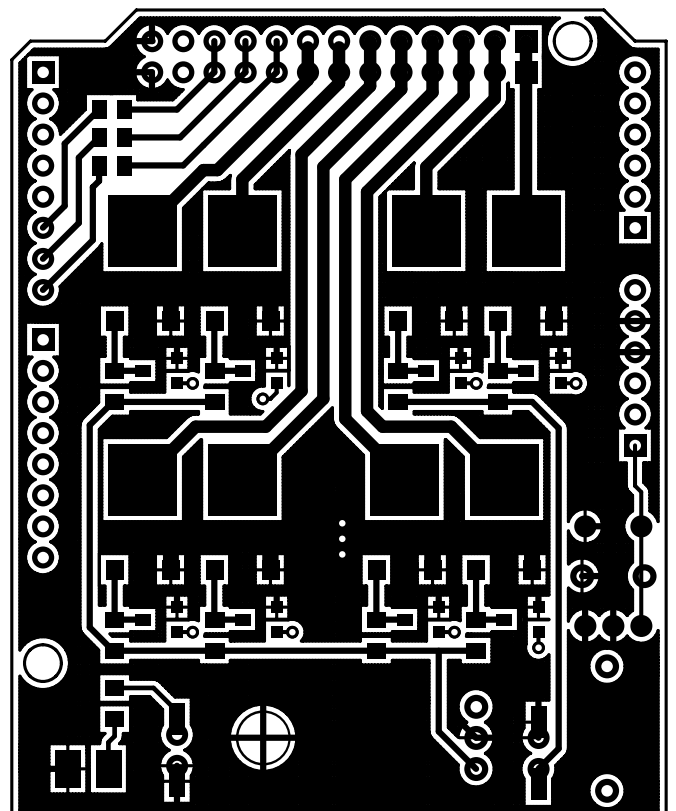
LED Matrix Common Cathode Driver Shield PCB Copper Pattern (Top Layer)
